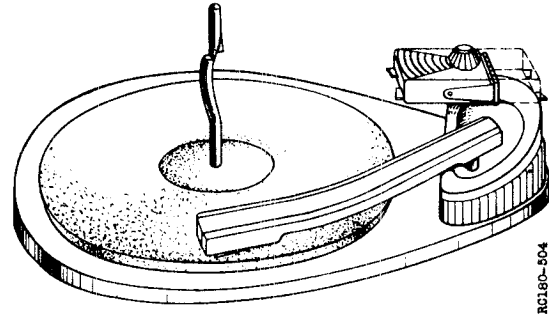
B - Record Changer RC180, Top View Showing Pear-Shaped Pan.
